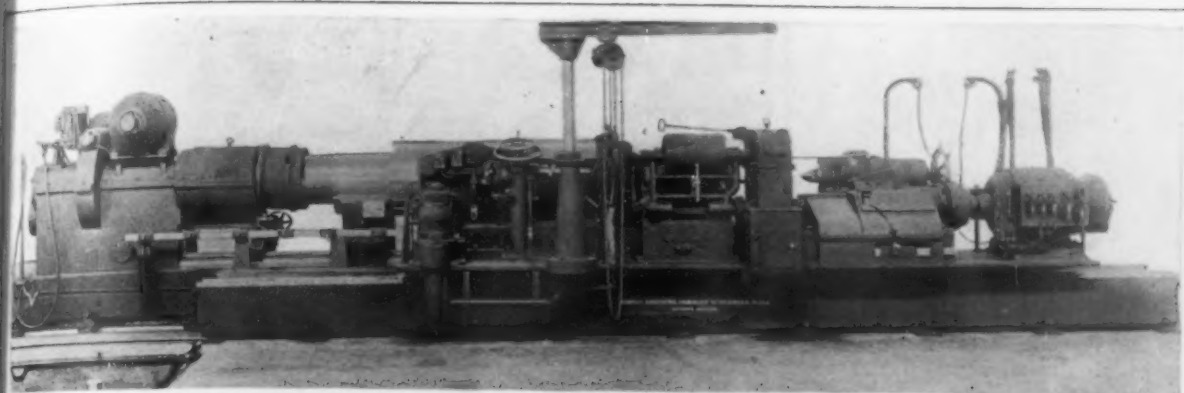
The Roll on the Pillow Block Bearings in Position for Grinding
